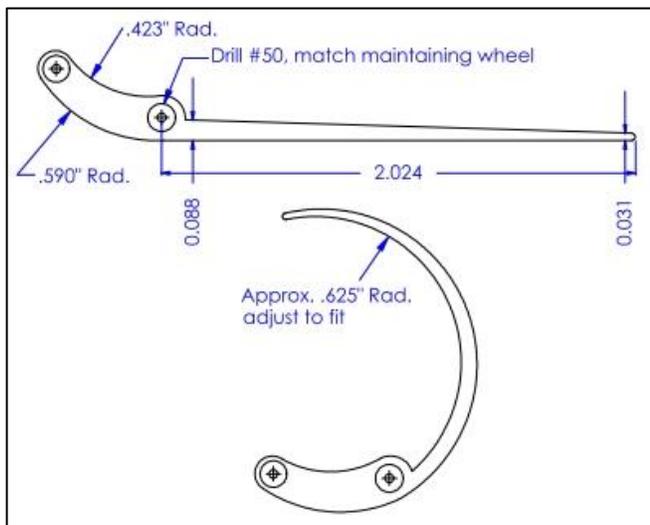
Construction drawing of the fusee click spring. As with the click, dimensions are approximate. The spring is cut from 1/32" brass sheet shown in the upper drawing and then bent into the shape of the lower drawing.
